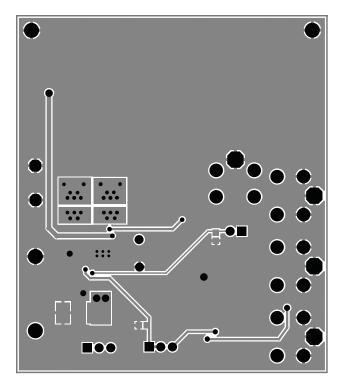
AAT1281 Evaluation Board Bottom Side Layout.
